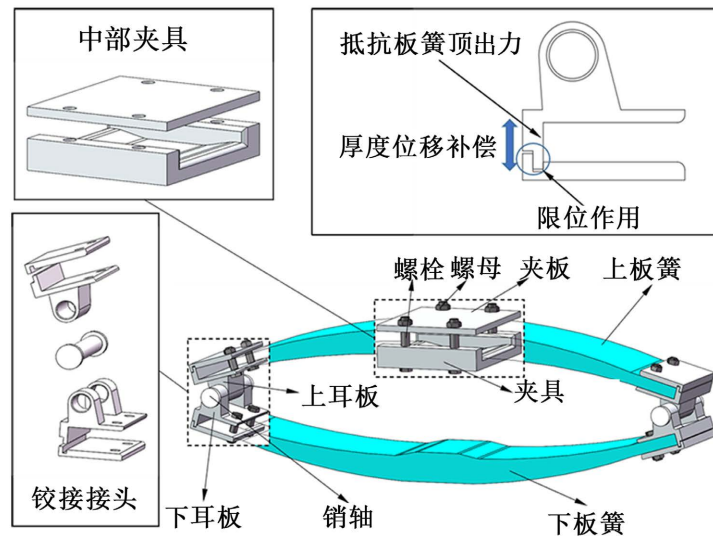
Three-dimensional model of the buckle-type leaf spring assembly
